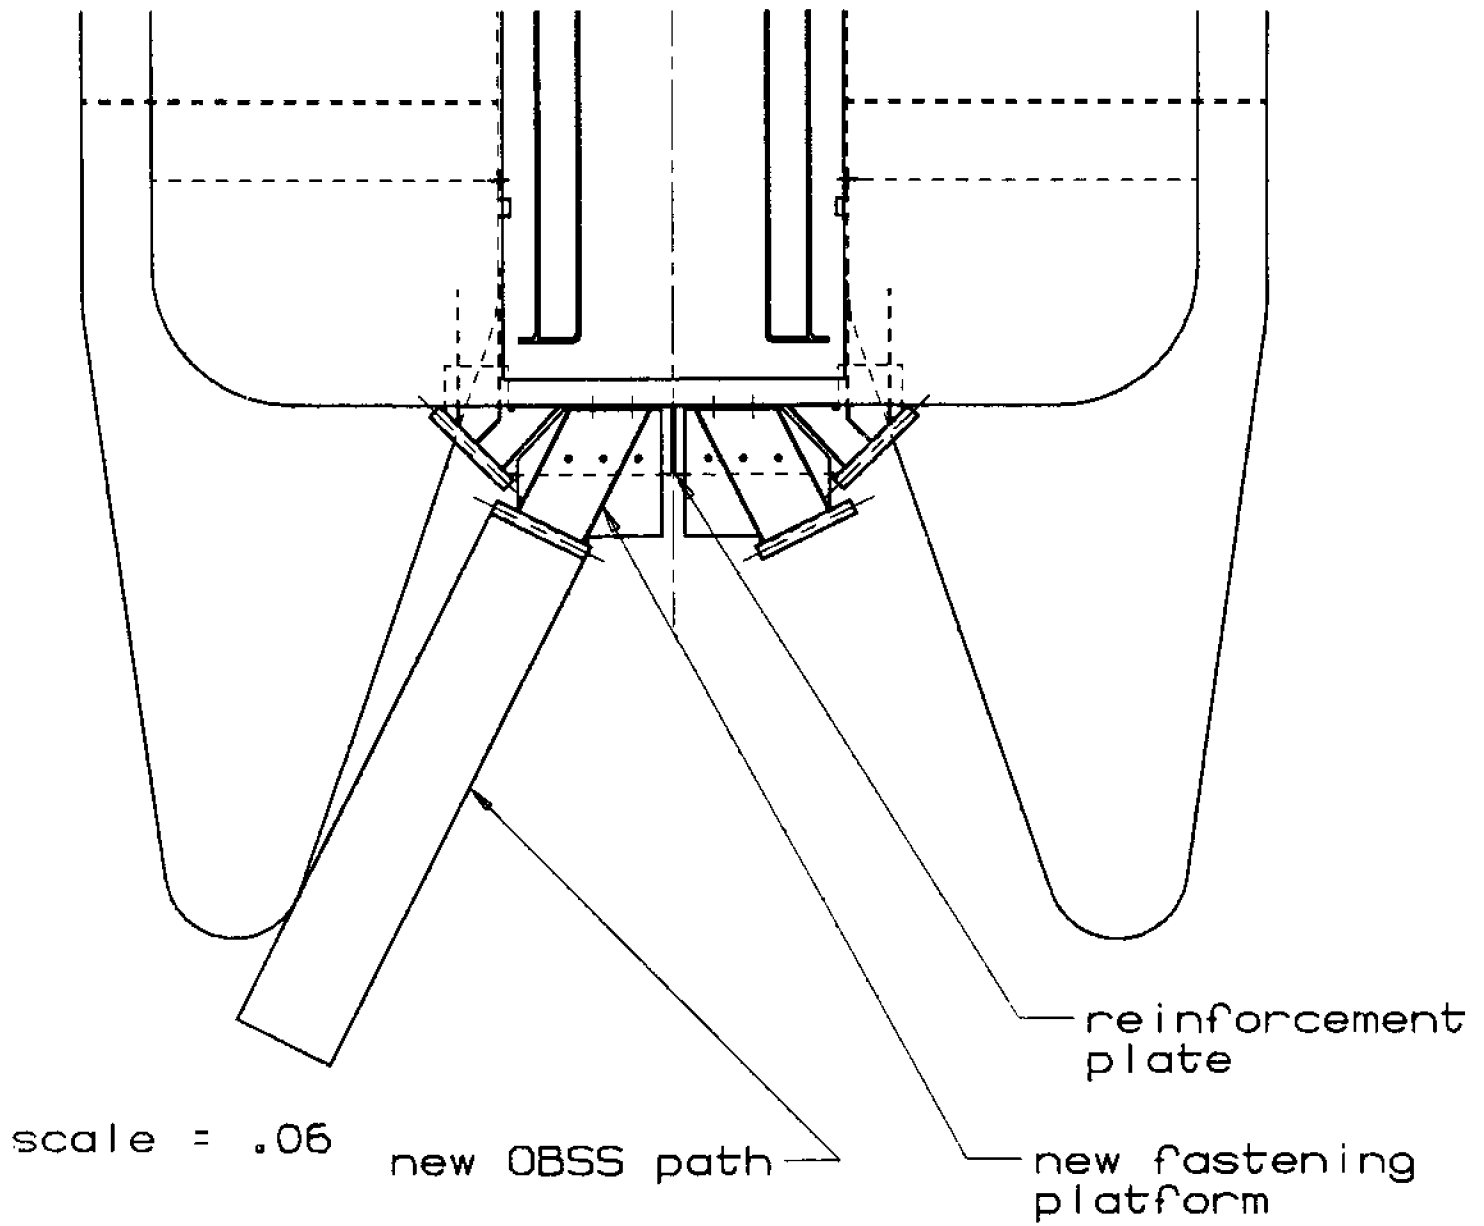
Installation of reinforcement plate and new fastening platform (top view).
